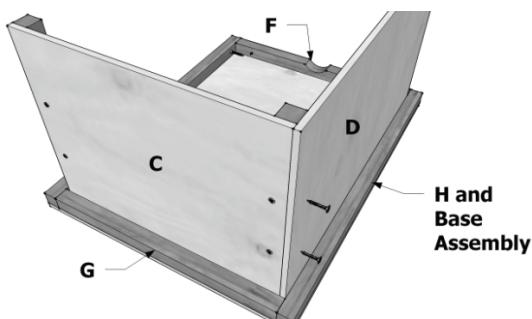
Assembly of solid sides of bench, parts C and D. Screws spaced evenly.
